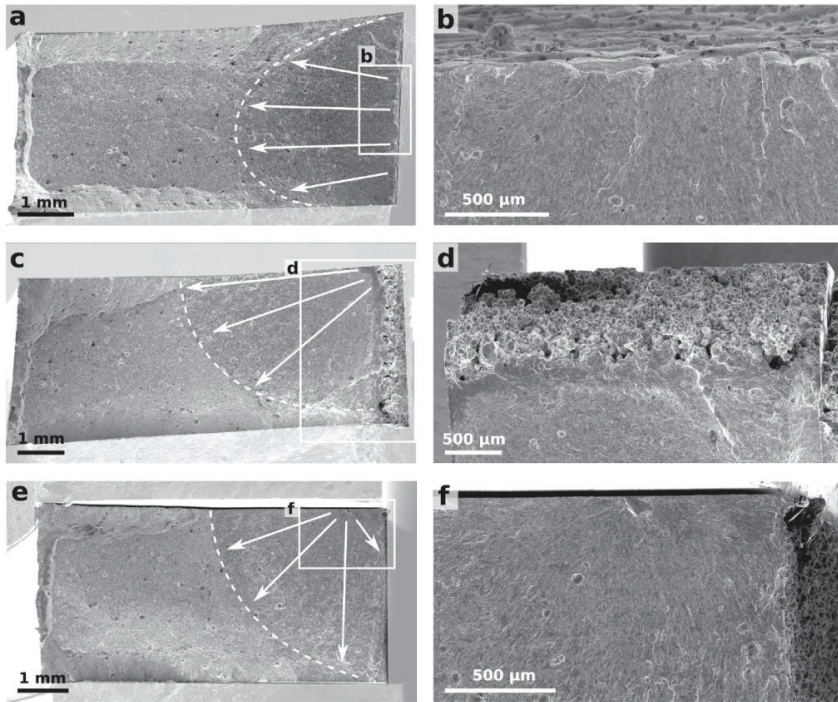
Fracture surfaces of three different fatigue initiations: (a and b) 0°, fatigue initiation from the centre of the AB surface, (c and d) 135°, fatigue initiation from the corner of the AB surface and (e and f), 60° fatigue initiation from internal defect.
